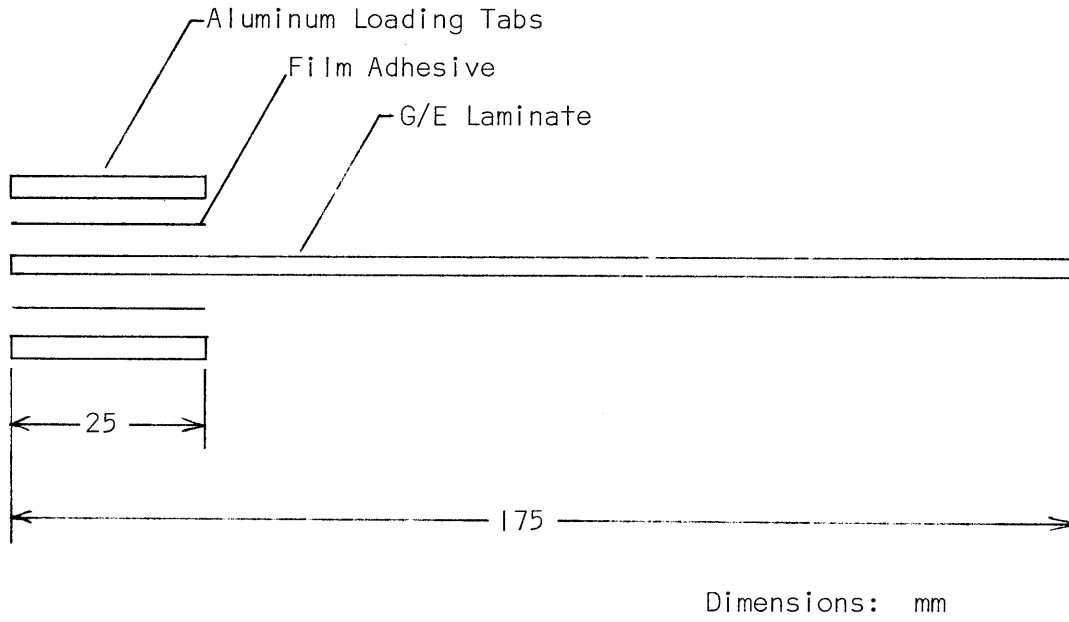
CANTILEVER BEAM CONSTRUCTION
